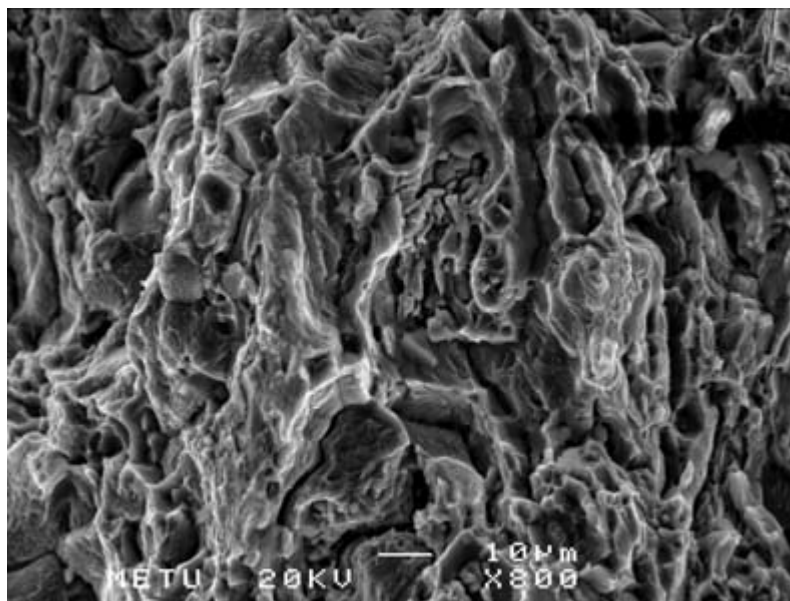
Mixed type of fracture surface of 7050-T73651 alloy tested in LT orientation.
